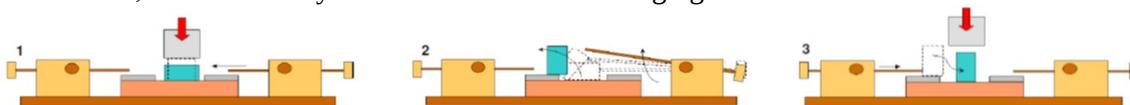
Upsetting of a test-piece by means of alumina rods. They flip the sample on a lower tool in the multipass forging equipment of the LGF
